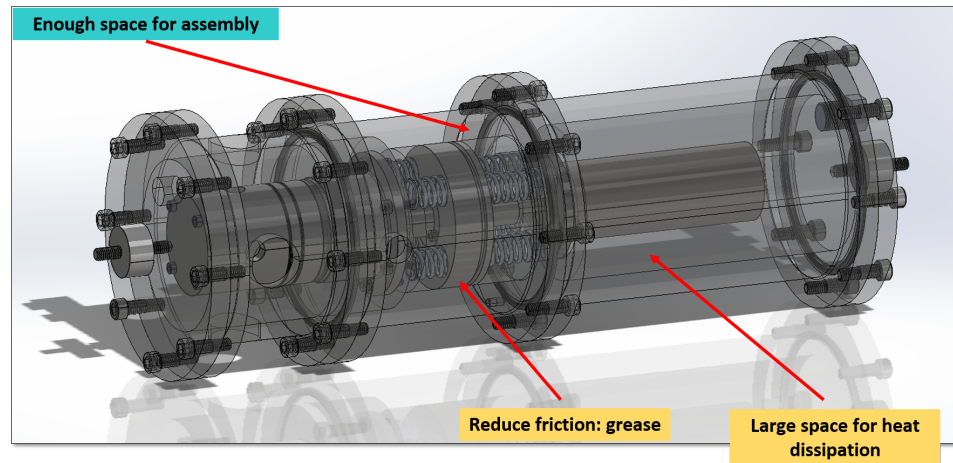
Schematic drawing of the final linear compressor prototype design (transparent view).
